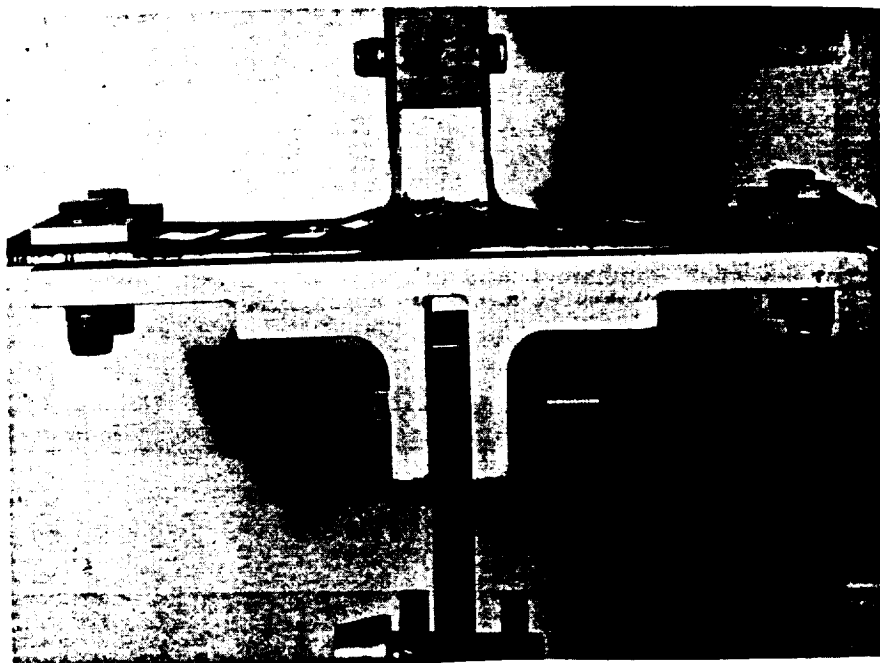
SKIN-STIFFENER SEPARATION SPECIMEN - FAILURE MODE
